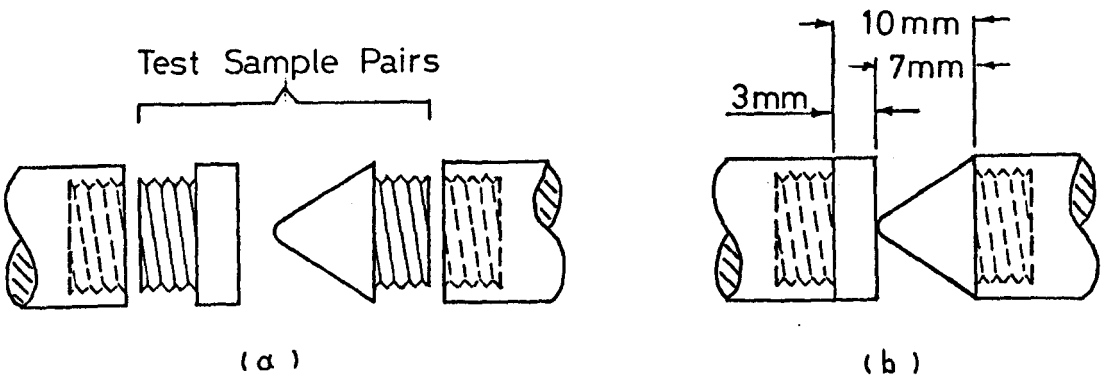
Insertion of test sample pairs into the test sample location of a coaxial contact measuring device.
